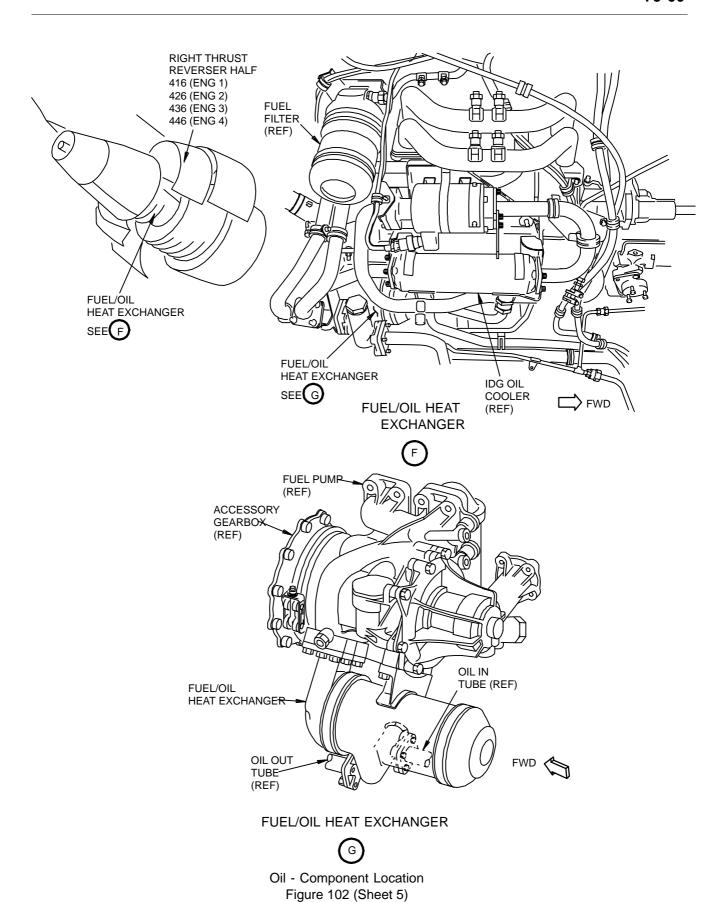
79-00 Oil Component Location Fig. 102 (Sheet 5)
